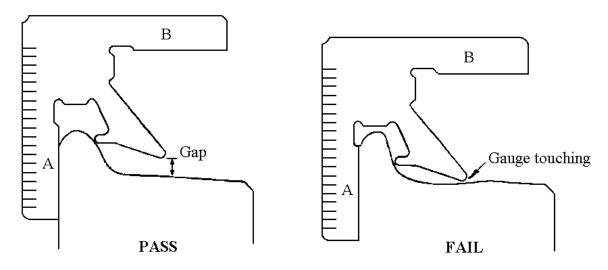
Use of GO/NO GO Flange Thickness and Height Gauge (BR Cat. No.39/29839) to measure Flange Thickness
